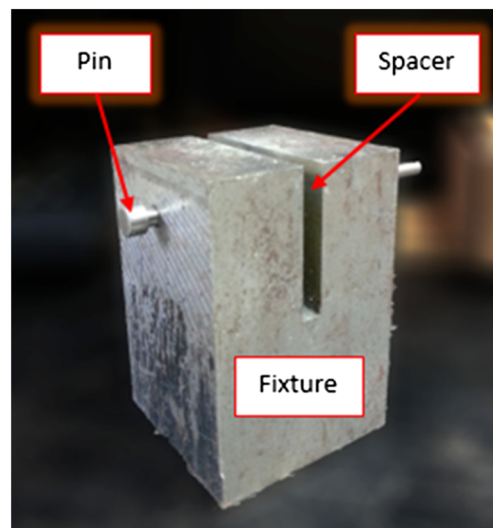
The modified test fixture according to ASTM D5961 Procedure-A
